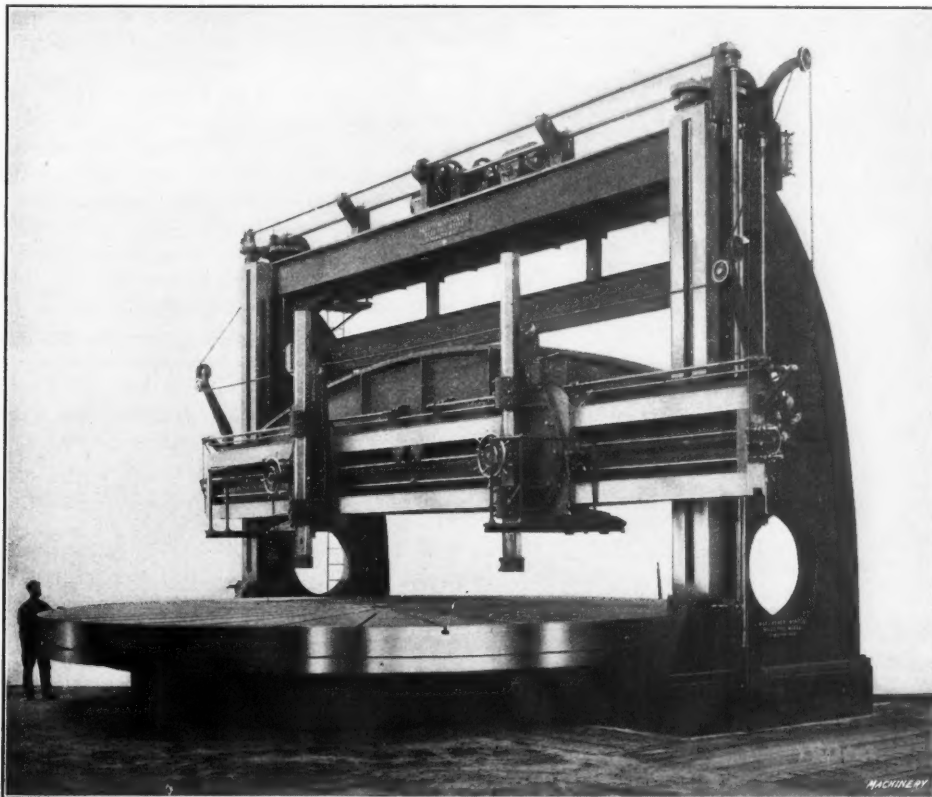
Niles-Bement-Pond 36-foot Boring Mill—the Largest ever built in America
